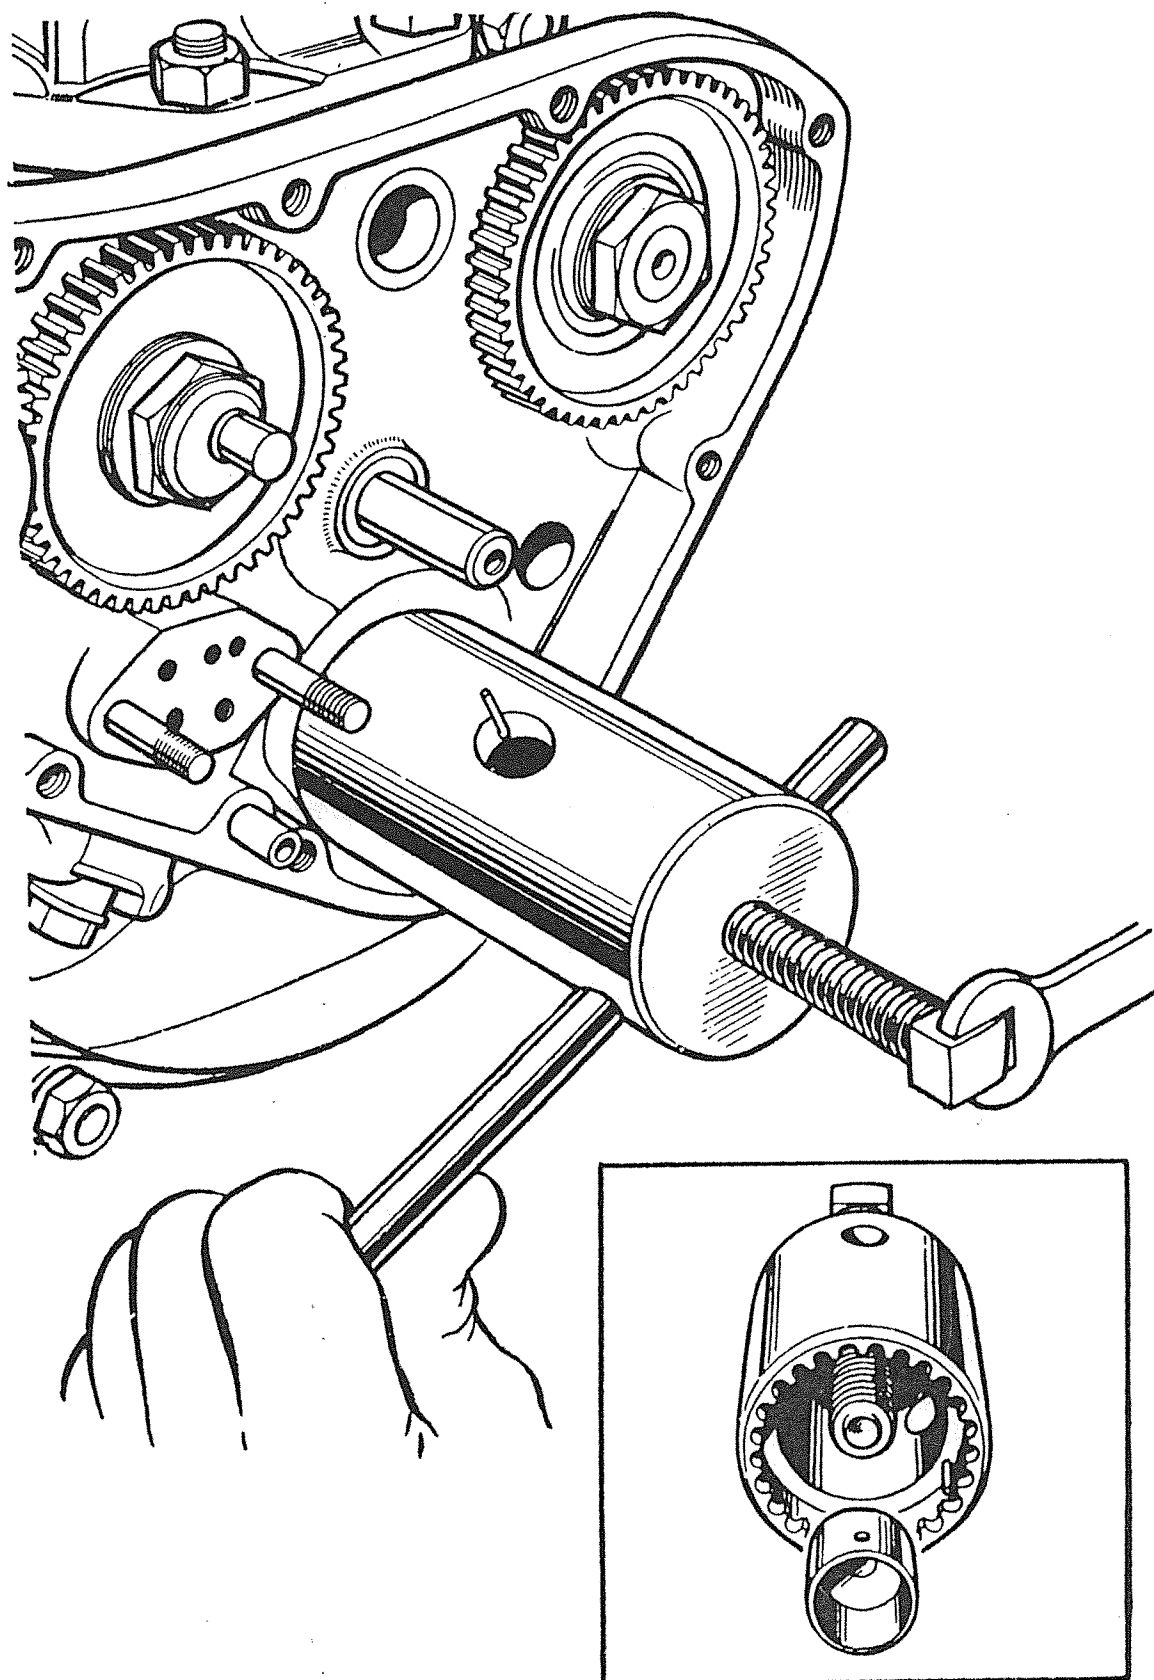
REMOVING THE CRANKSHAFT PINION WITH TOOL Z121.
